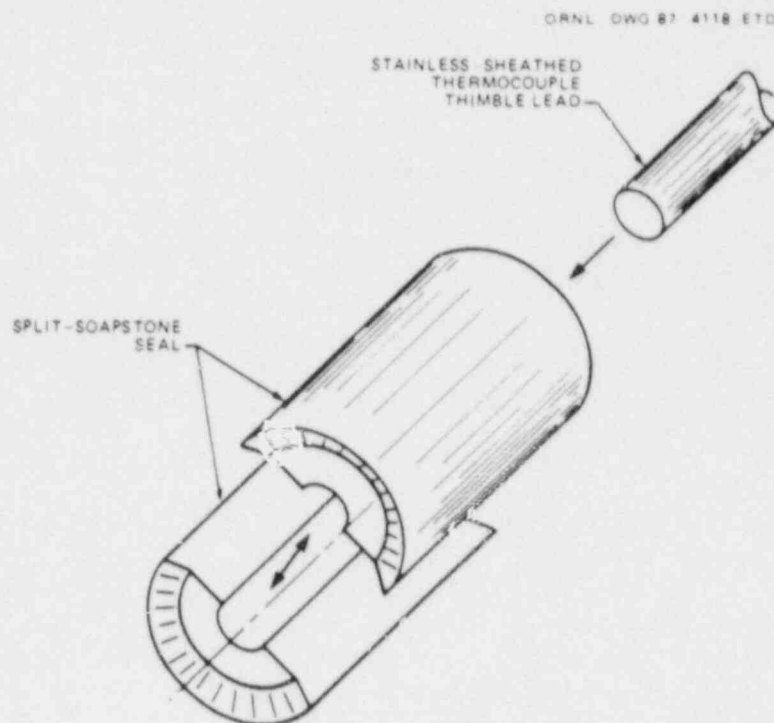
Configuration of split-soapstone seals for PTSE thermocouple thimble single-lead penetration.
